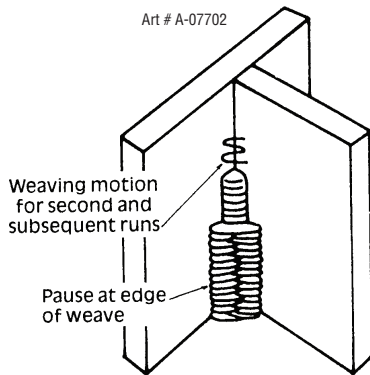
Multi Run Vertical Fillet Weld
